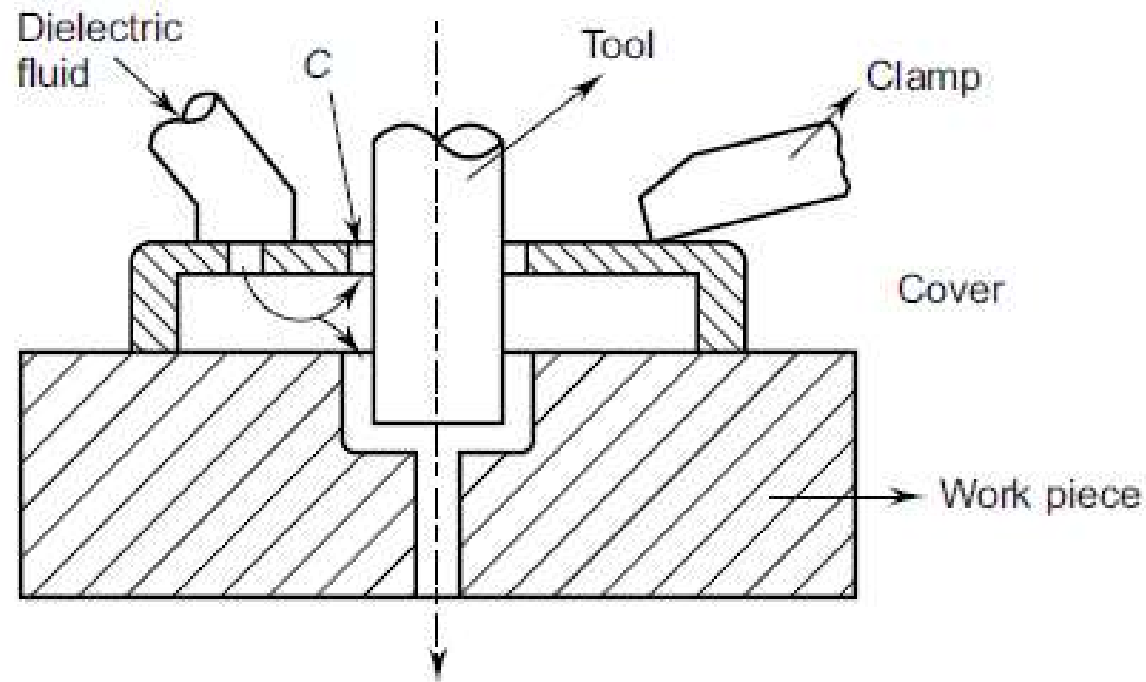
(a): Reverse flow flushing techniques used in the EDM process
